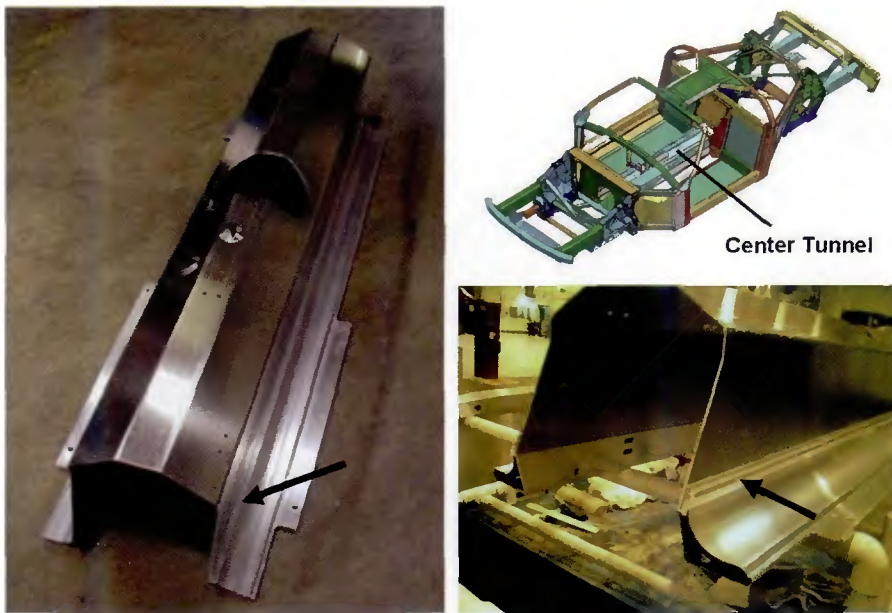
The central tunnel assembly of the Ford GT is a FSW assembly made from aluminum stampings and extrusions. Courtesy of Ford Motor Co.
